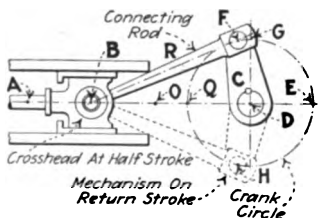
Showing position of crank when crosshead is at half stroke.
